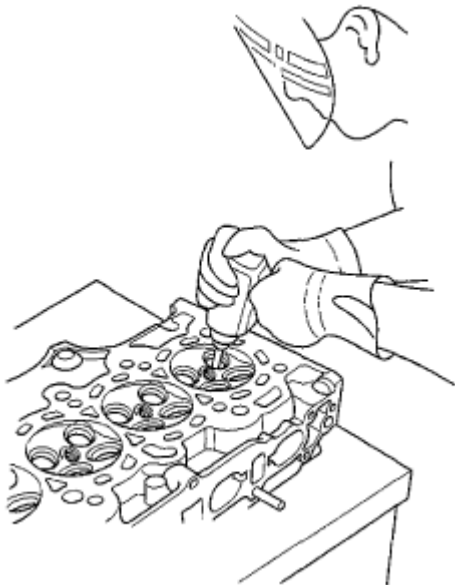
Driving Guide About 2 mm (0.08 in) Towards Combustion Chamber
